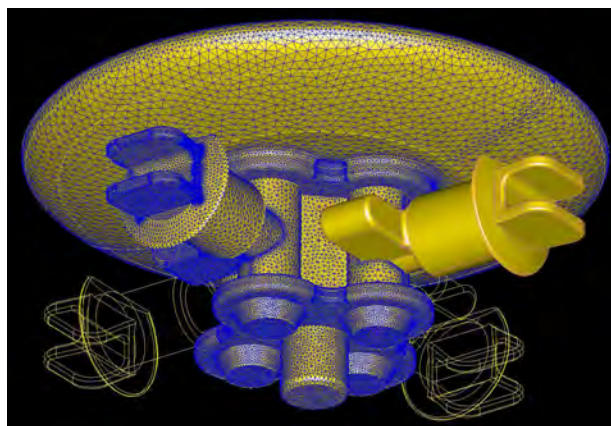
Detailed GOAHEAD CAD hub geometry and surface mesh
